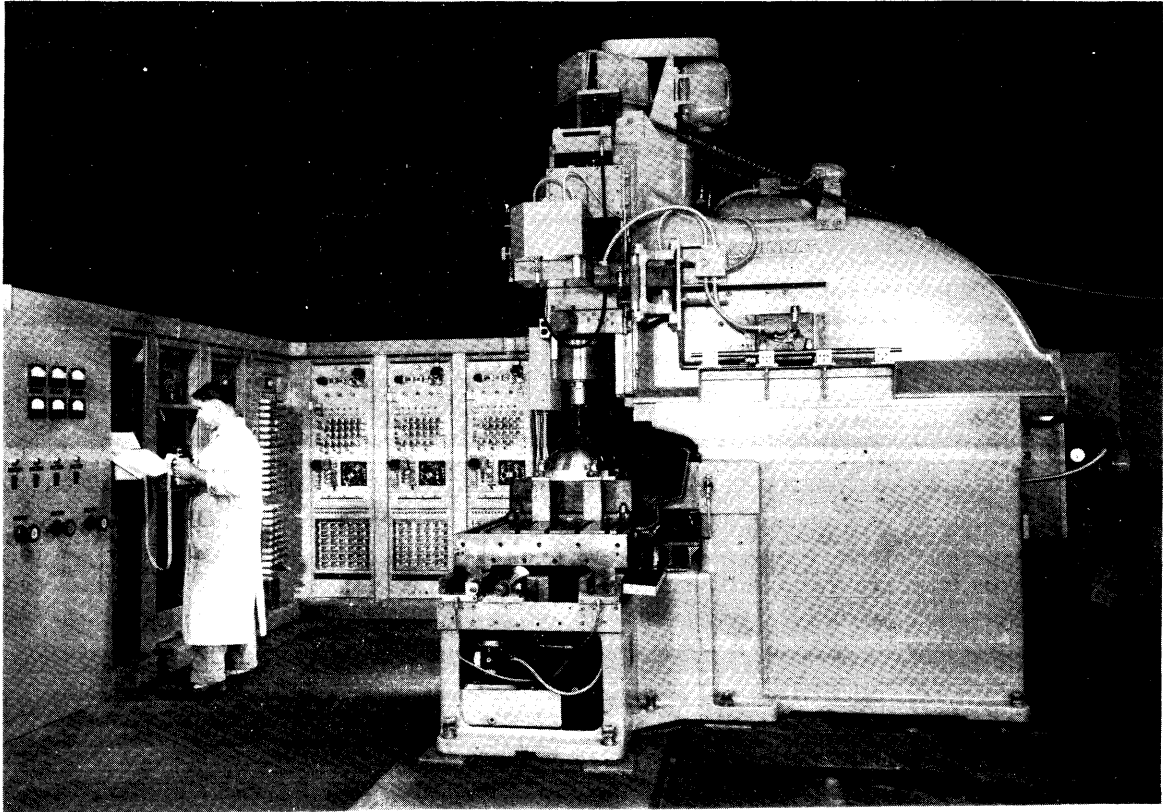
The M.I.T. Numerical Controlled Machine Tool
